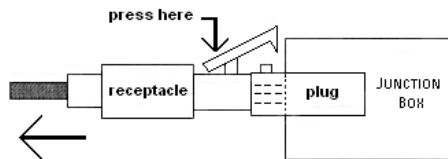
Side view of receptacle-plug removal from the Voltage Conditioner Plate.
